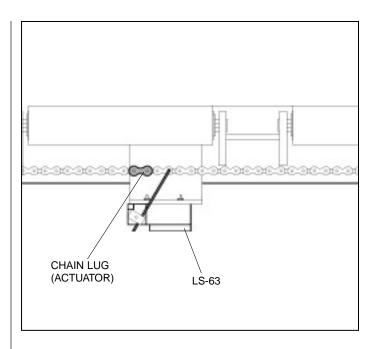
SWITCH LS-63 ON PALLET TRANSFER.
